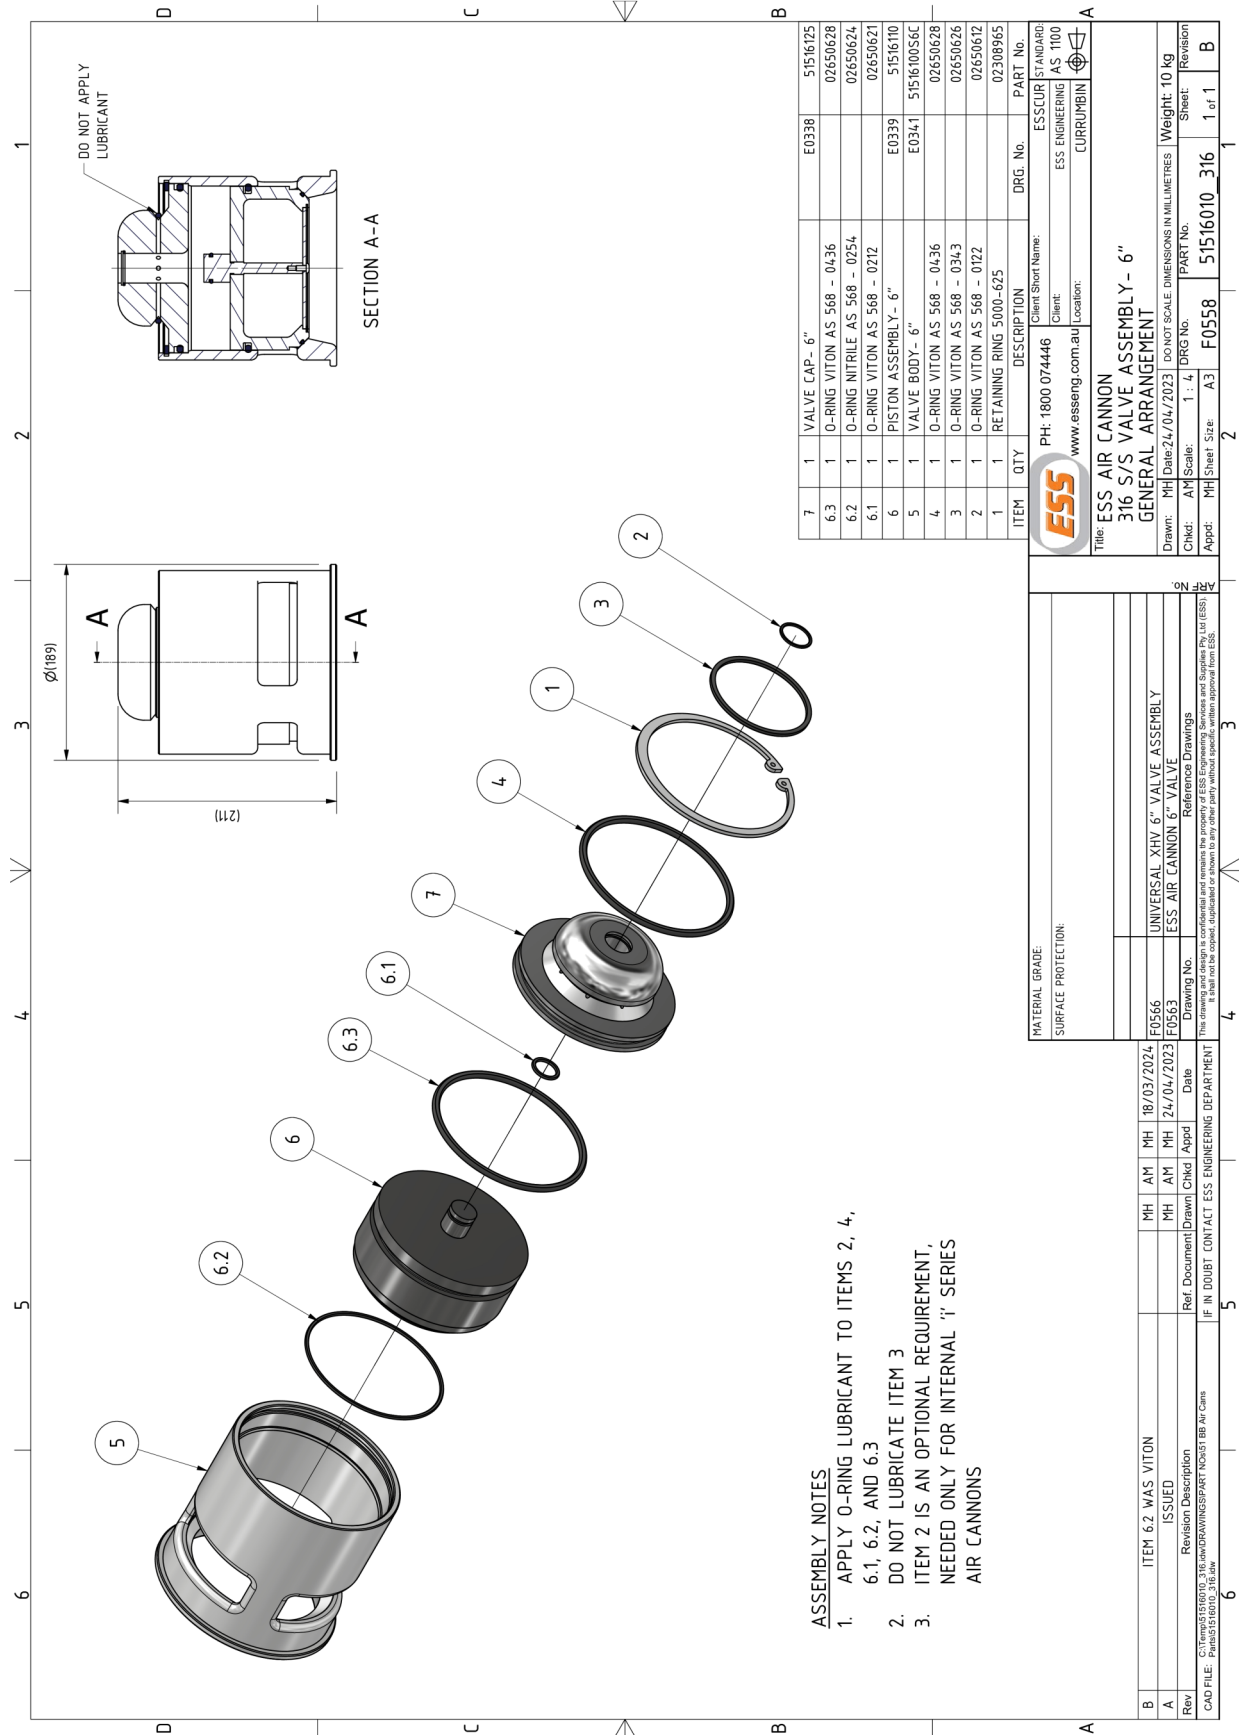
F0558 316S/S VALVE ASSEMBLY- 6" GENERAL ASSEMBLY
